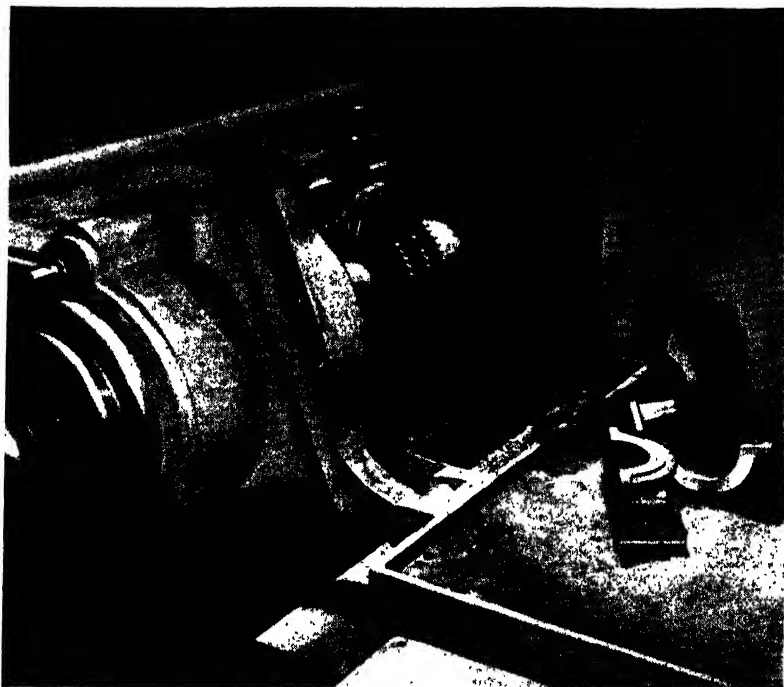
Finishing End of the Machine Shown in Fig. 14 from which the Individual Caps are Discharged
